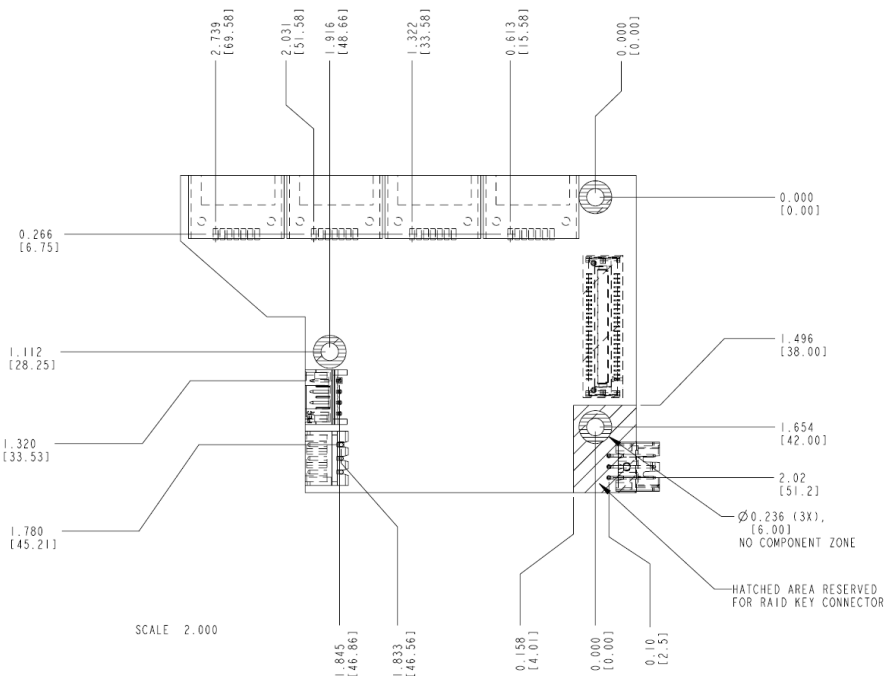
AXX4SASMOD Mechanical Dimensions (Top View)
